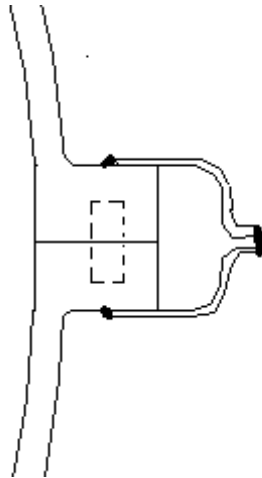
Split casing with pins and lip seal. This can be nibbled or sheared off for disassembly.
